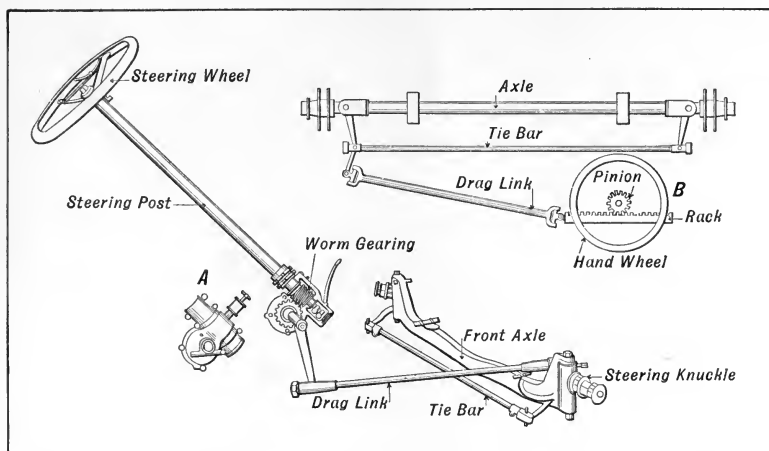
How Front Wheels of Motor Cars are Moved. A—Conventional Worm-Gear Reduction Steering Arrangement. B—Simple Rack and Pinion System Used on Light Cars.
